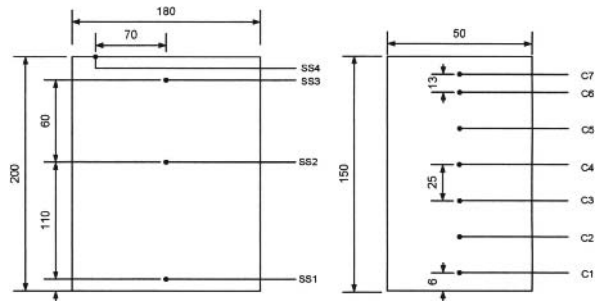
Probe arrangement in the stainless steel billet (SSx) and the carbon (Cx) (mm)
